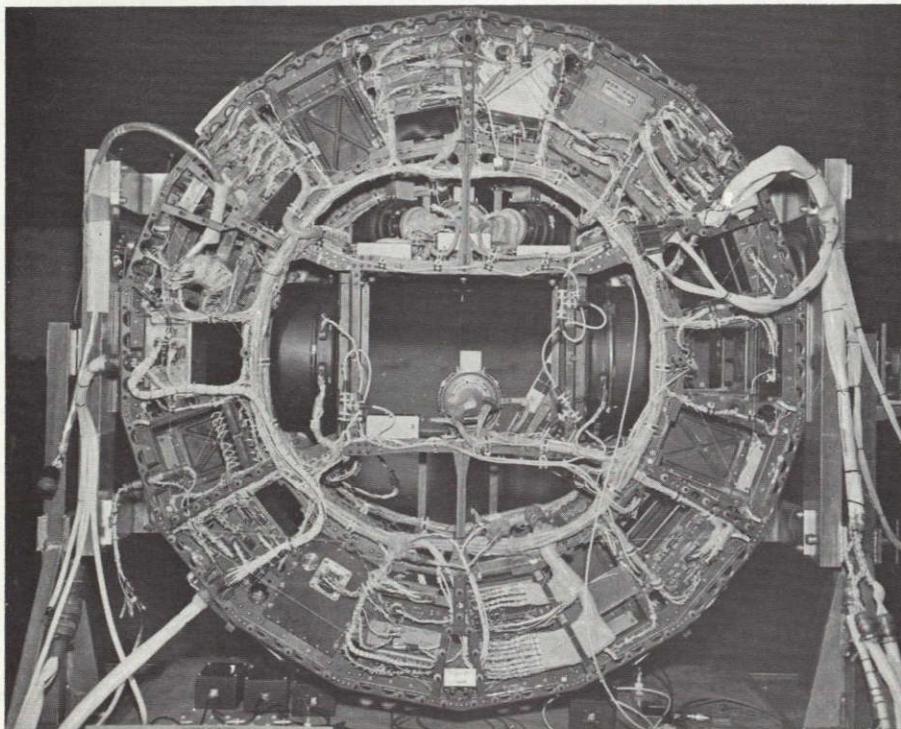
Nimbus A Component Locations in Sensory Ring - Top View
